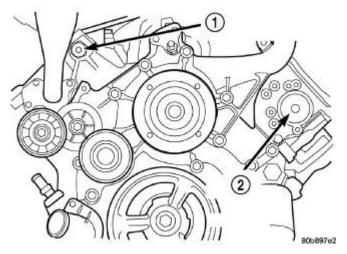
Removing/Installing Cylinder Head Access Plug Courtesy of CHRYSLER LLC
